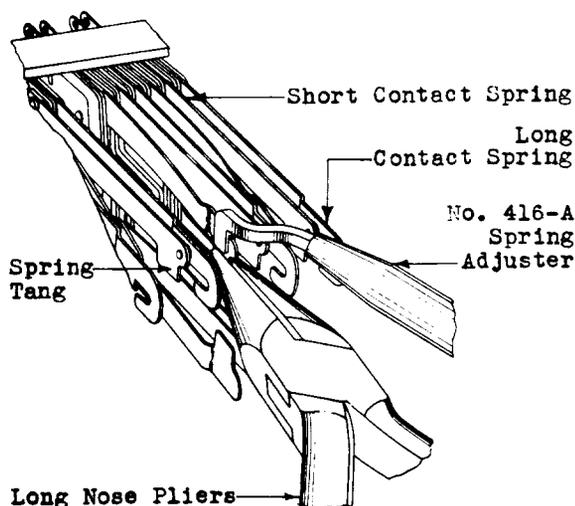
Method of Adjusting Short Spring Tang for Contact Separation
